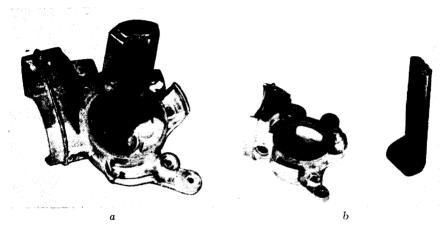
How loose die pieces are used. In a the loose piece is still in the casting after it has been ejected; in b, the loose piece is removed to show the undercut that has been formed.
